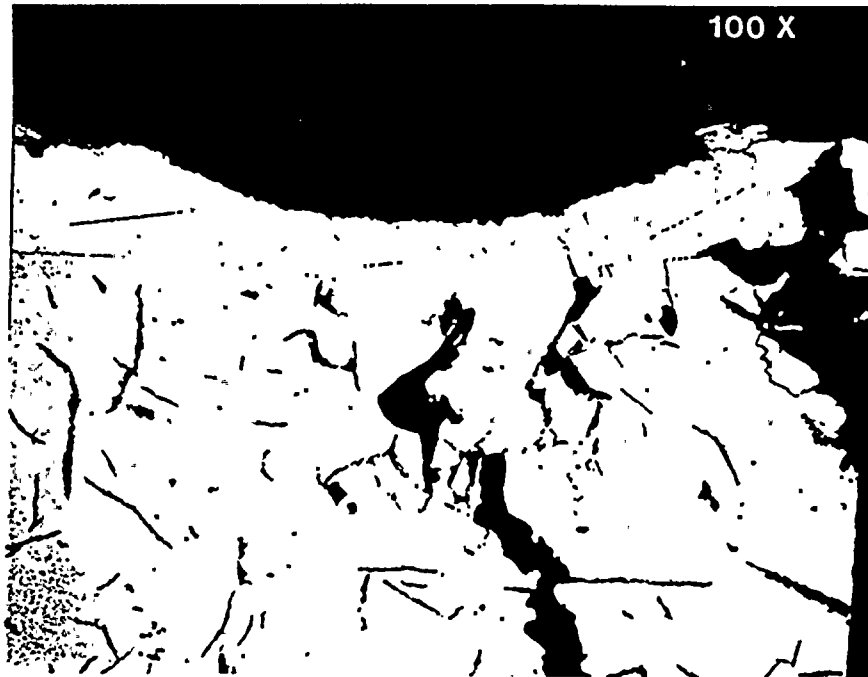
Transverse cross-section (labeled area 'D') taken 7 1/2 inches from the bottom of the B diesel 7L liner showing depressions in the Cr plating surface, cracking of the base metal casting and deposited metal.
